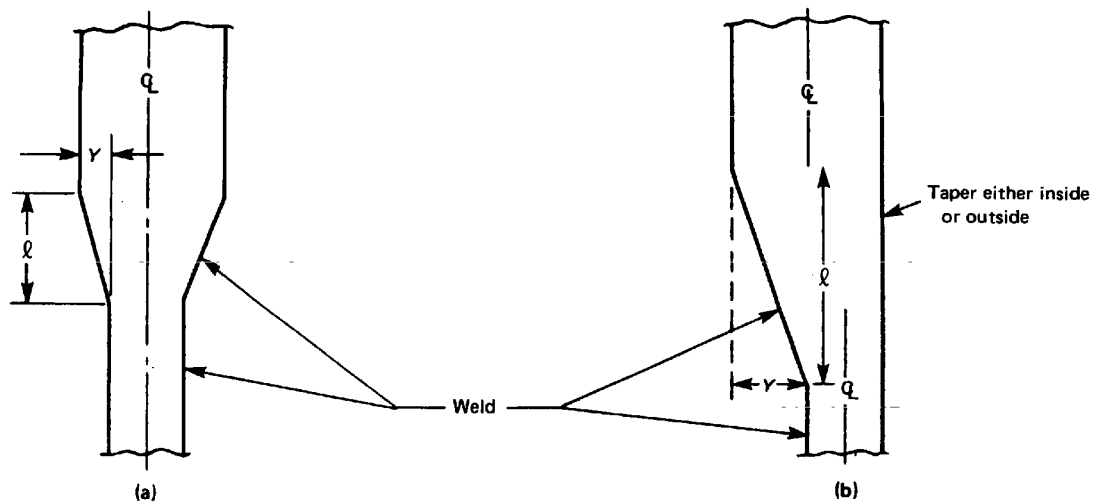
(a)-1 TYPICAL WELD DETAILS REFERENCED
